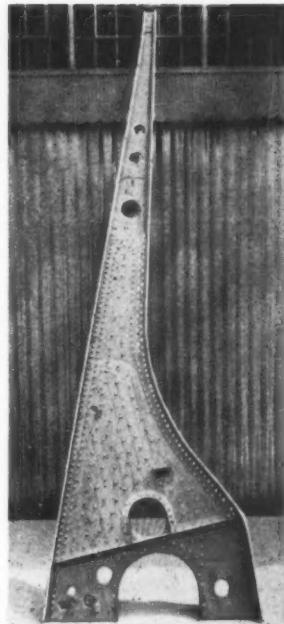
One of the Spiders which Form Part of the Crown of the Bulkhead Shown in Fig. 2. This Part is Flame-cut from a Steel Billet and then Machined
